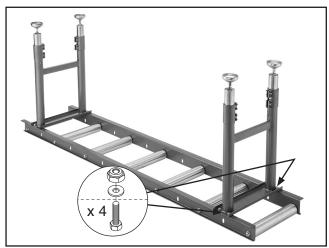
Removing leg assembly to attach T28378 Mounting Plate.
